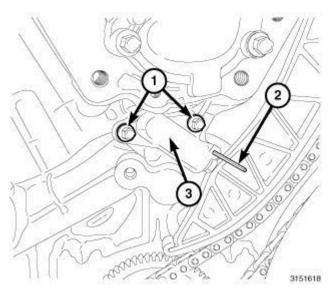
Left Timing Chain Tensioner, Pin & Bolt Courtesy of CHRYSLER GROUP, LLC
